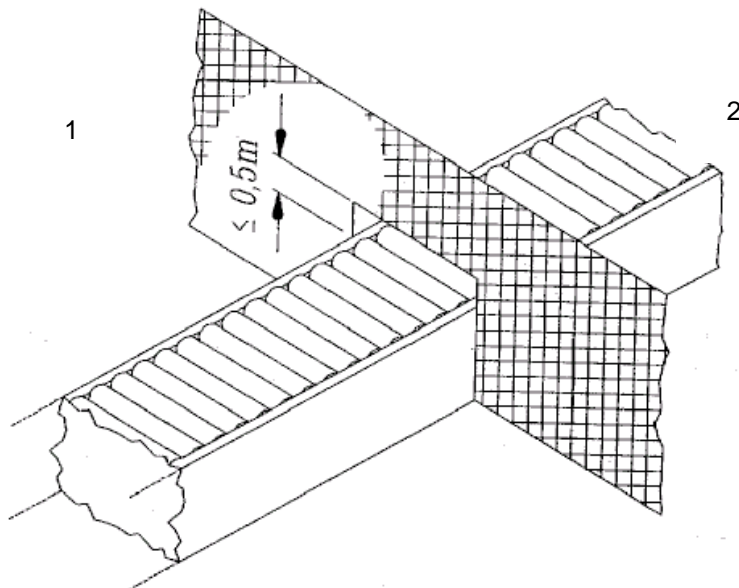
Protection between roller conveyors and conveyed unit loads
